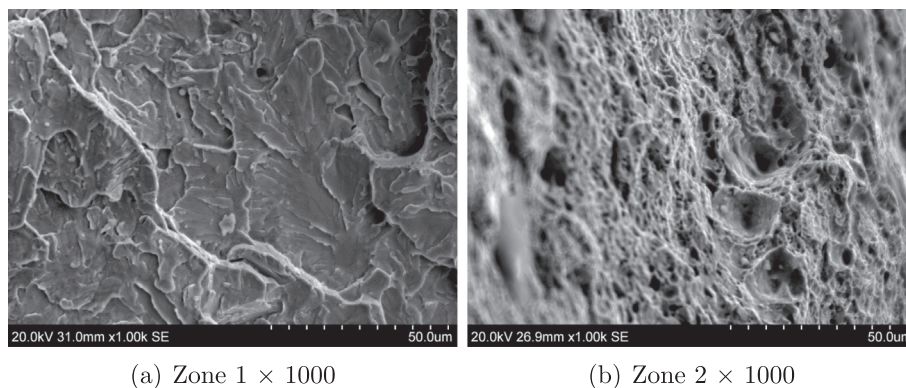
SEM images of (a) cleavage fracture in zone 1, and (b) ductile fracture in zone 2, both taken from pipe B.
